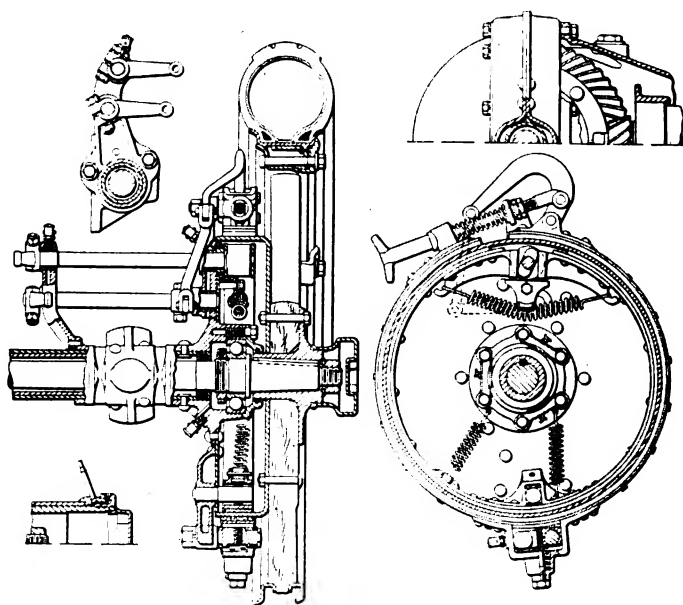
DOUBLE EXTERNAL AND INTERNAL BRAKES USED ON THE PACKARD SINGLE-SIX CAR
